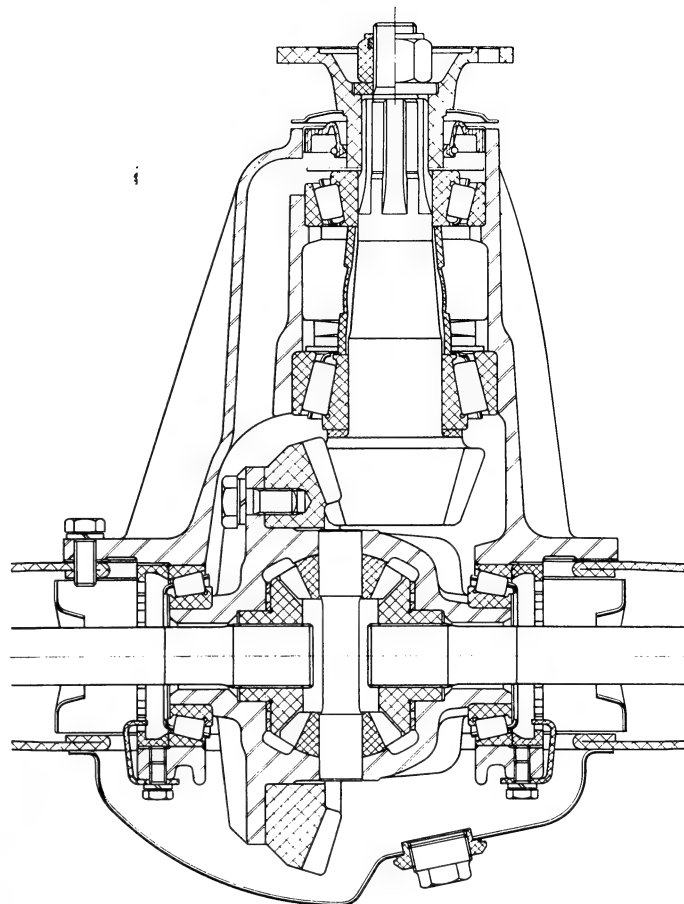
Section view of differential carrier assembly across final drive gear and differential case gear.
